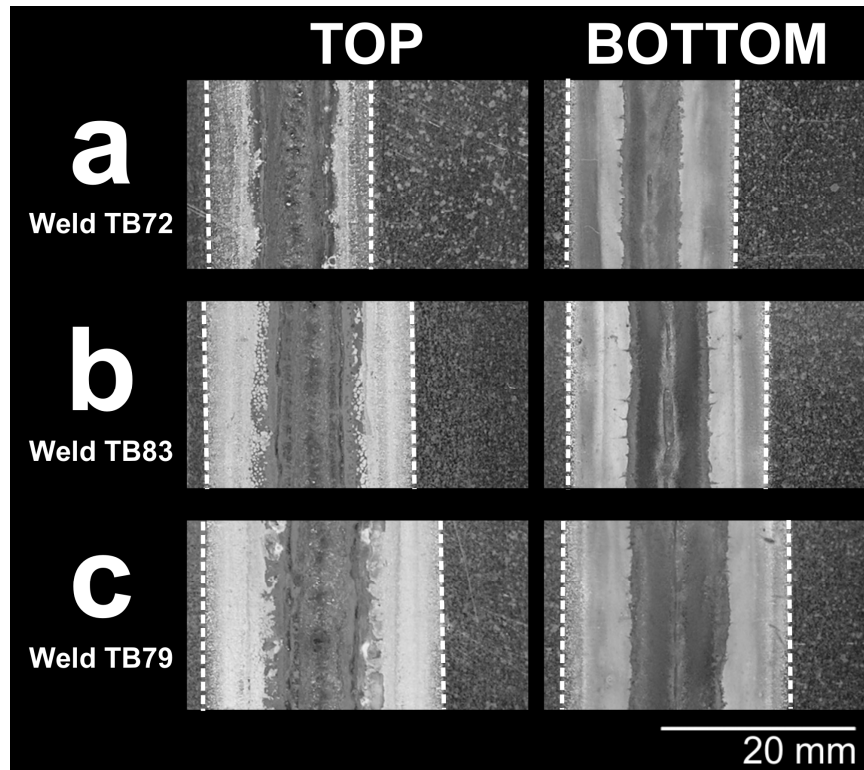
Sample images for the selected welds from Phase 2 welding trials. The image in a) shows the lowest heat input weld (TB72), the image in image b) shows a mid-range heat input weld (TB83), and the image in c) shows the highest heat input weld (TB79).
